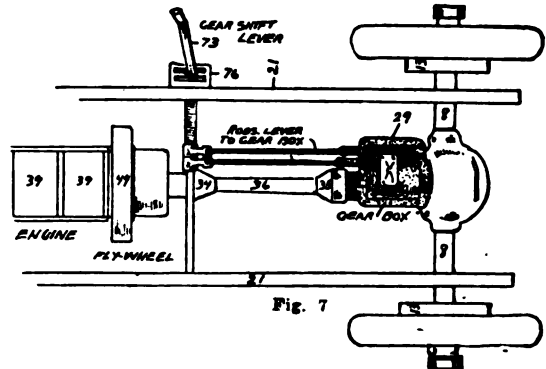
The method of placing the gear type transmission on the rear axle. See also page 204.
